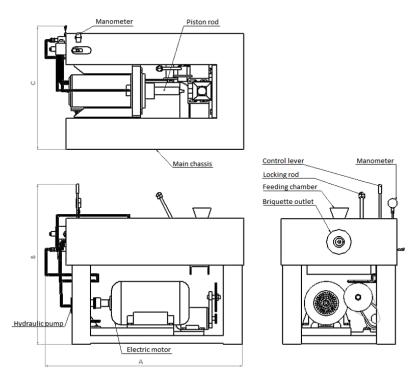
Hydraulic briquetting machine (A: 1280 mm; B: 1155 mm; C: 740 mm)
